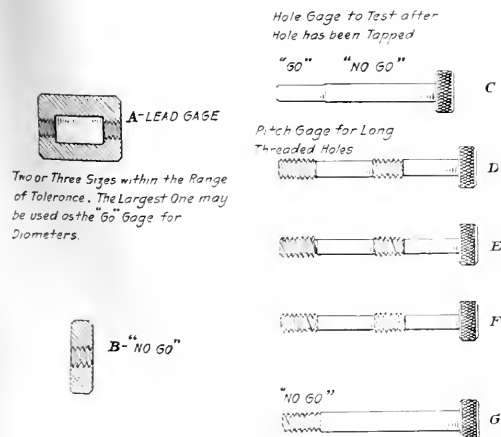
SYSTEM OF GAGES FOR SCREW PARTS
